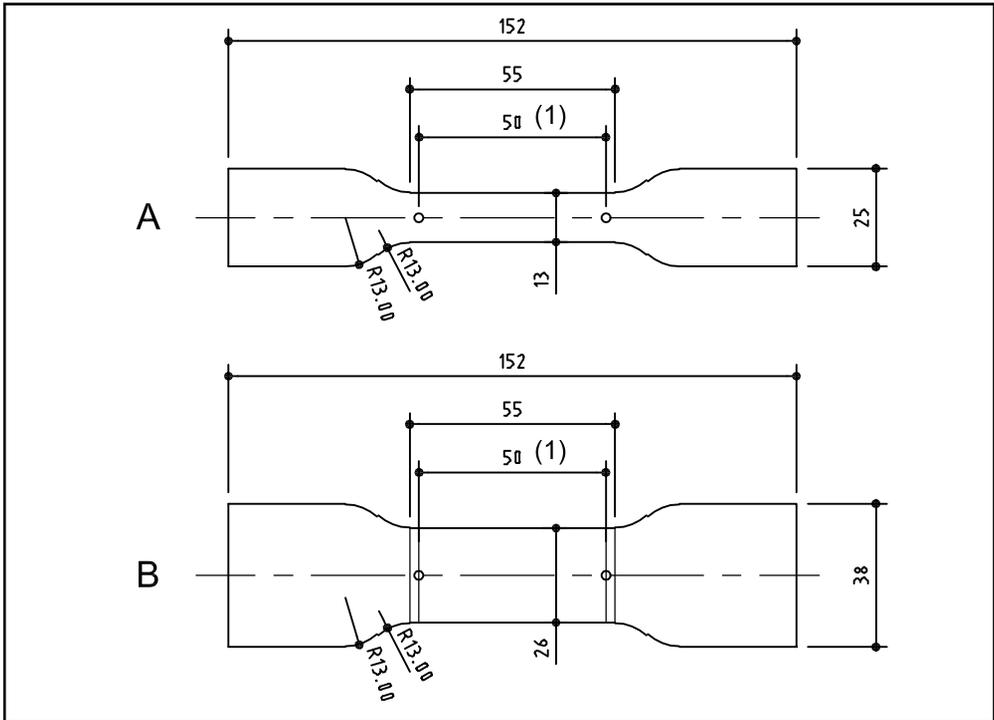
Tensile Specimens Dimensions in mm
